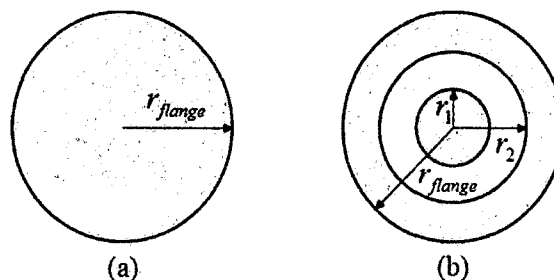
(a) Load and (b) reference samples for ASTM D4395-based test fixtures.
